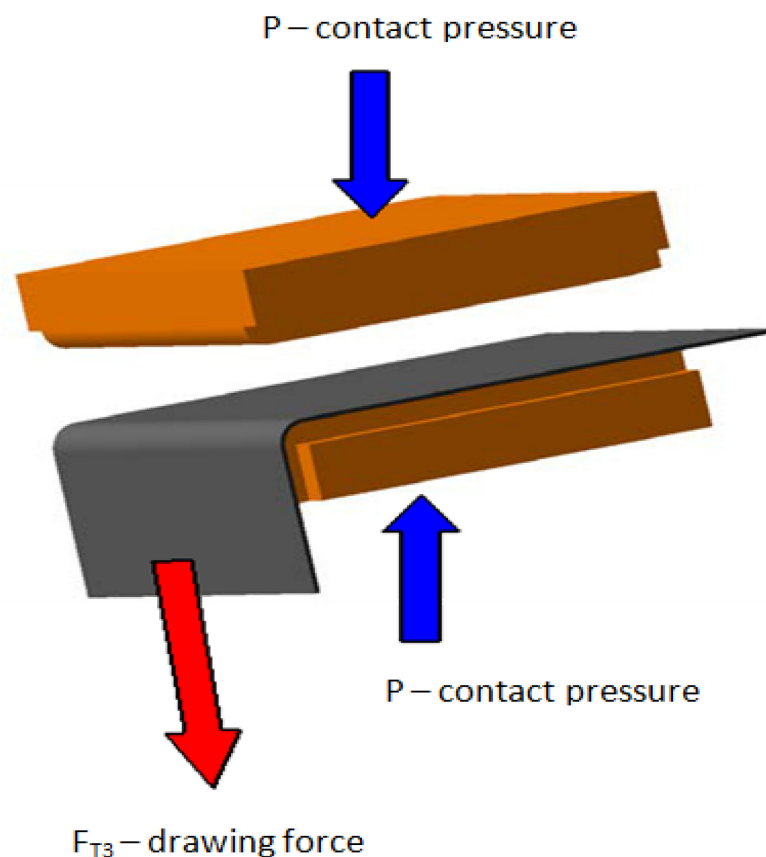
Strip drawing test – simulation of drawing force after bending
